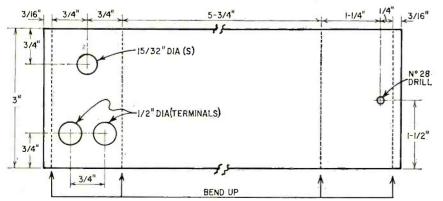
Chassis layout and dimensions. Aluminum sheet 1/16 inch thick is good to use. Make a cover to fit if you wish. Different terminals may require different mounting holes.
